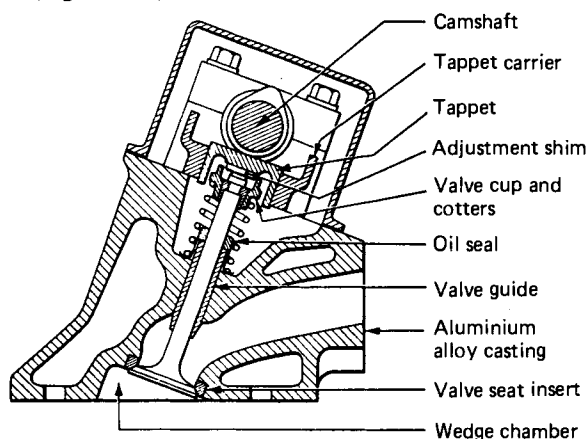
Section through cylinder head of an overhead camshaft engine with a wedge-shaped combustion chamber
